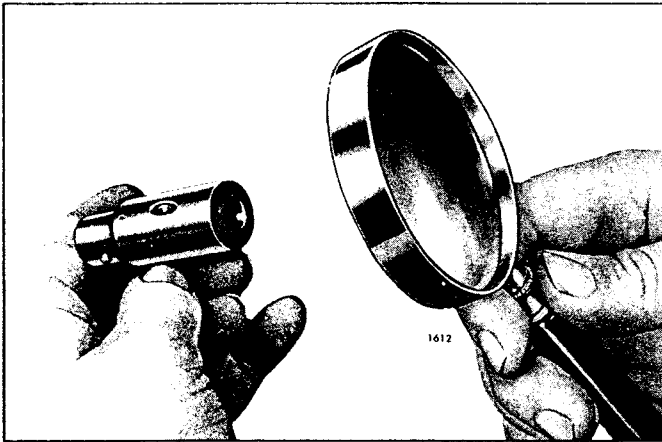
Examining Sealing Surface with a Magnifying Glass
